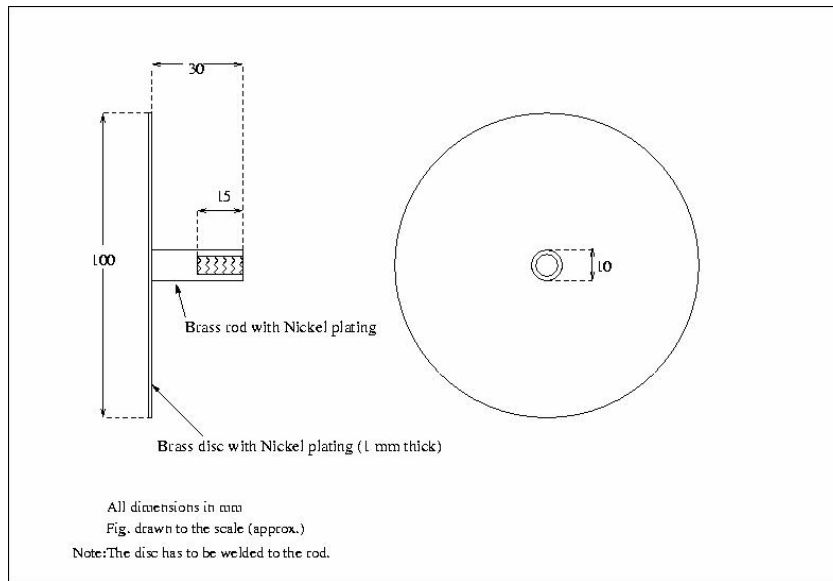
Probe for the coaxial feed with optimized dimensions
